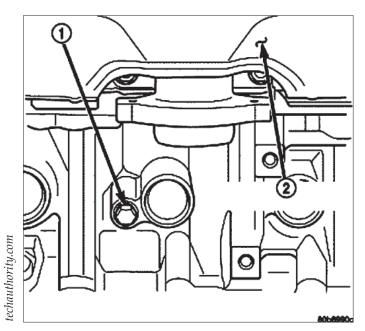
Some engines still use block drain plugs, so check for one and remove it to improve the percentage of coolant drained. Shown as (1) is the 3.7L-V6 drain plug on a Jeep Liberty; it is just below the exhaust manifold (2).
